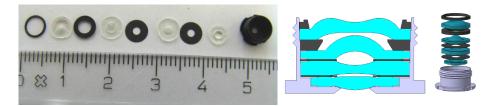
Components of the lens module, cross section and exploded view of the assembled lens module
